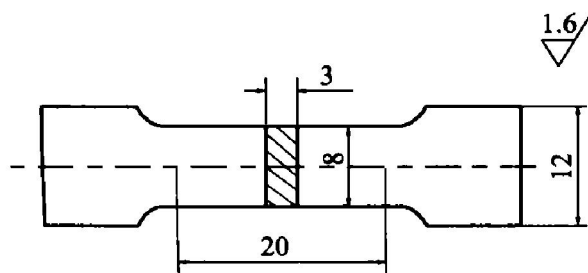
Dimensions of tensile plate scanning electron microscope (SEM).
